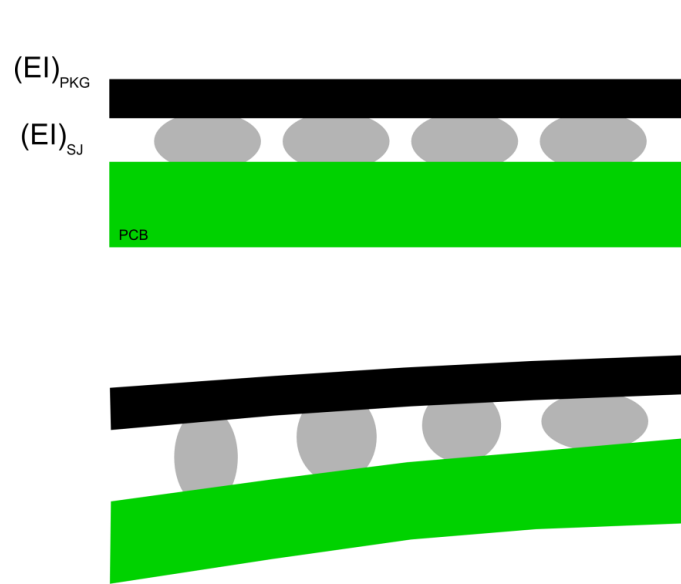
Hypothesized effect of PCB bending on solder joint interconnects
